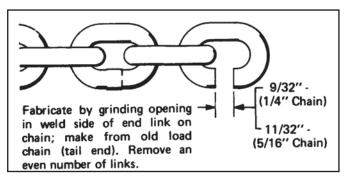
Open "C" Link for Removing and Installing Coil Load Chain
